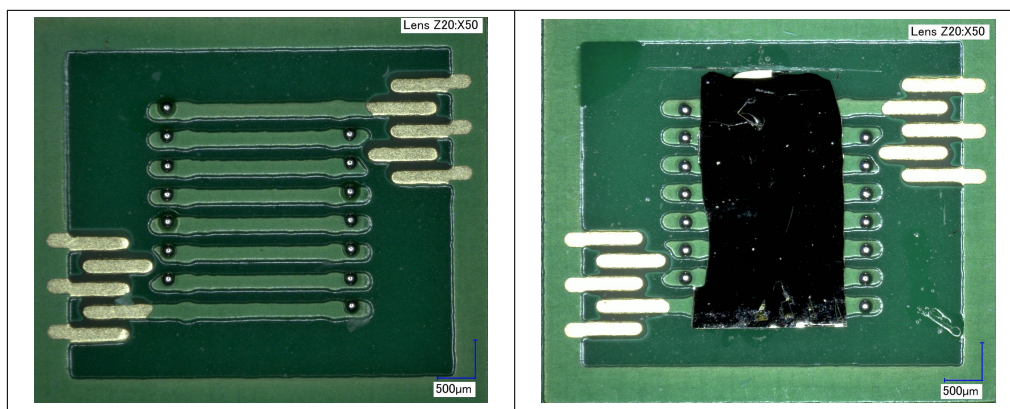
(Left) lower PCB with mounted solder balls; (Right) lower PCB with affixed multi-layer CZTB magnetic core.
